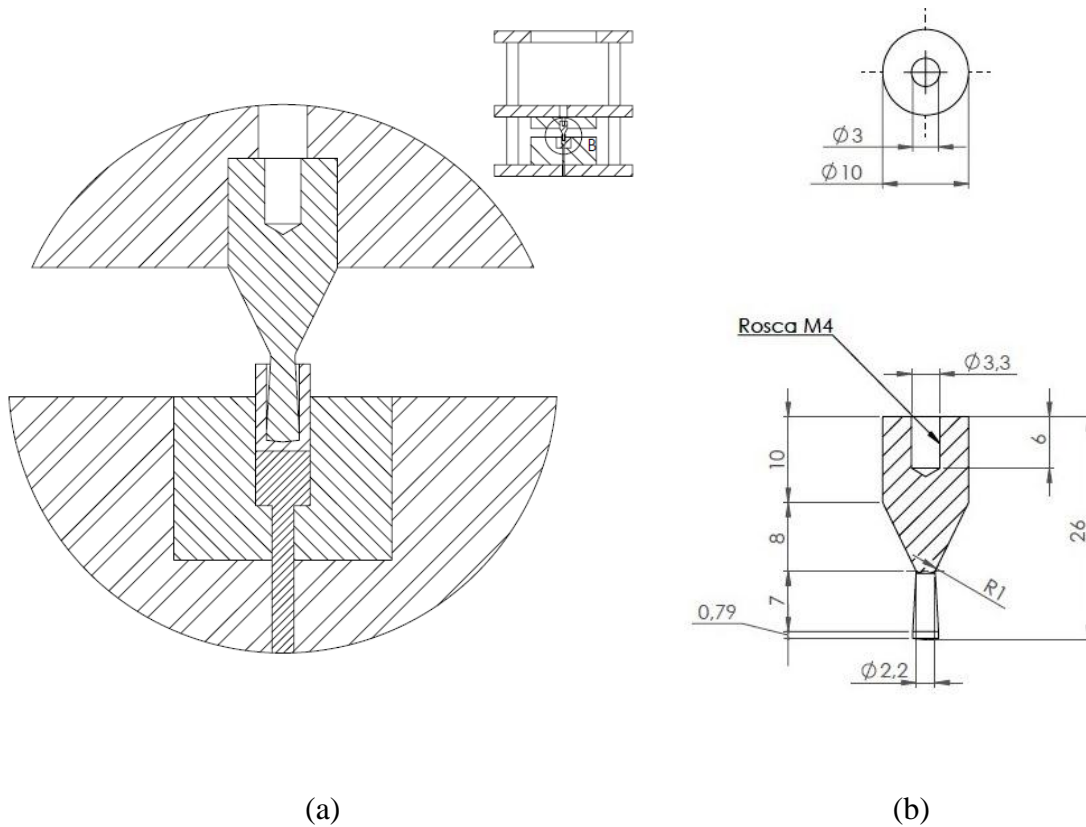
Dimensions of the 3 mm diameter punch: (a) mounting position, (b) detail of the punch
